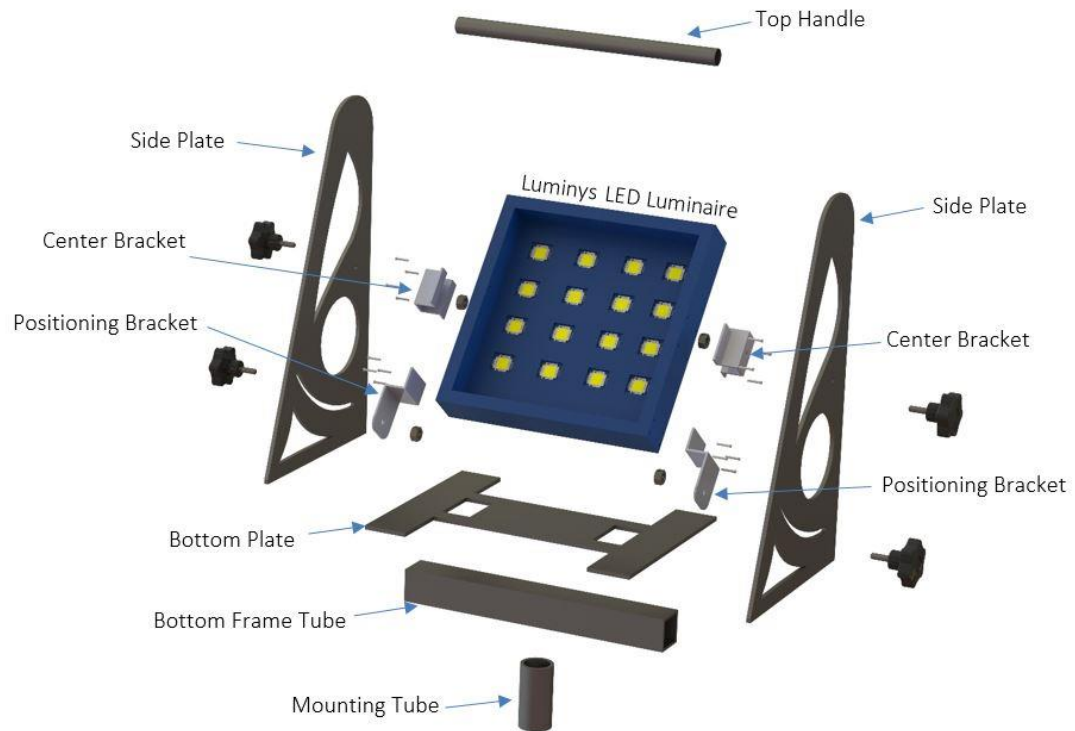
Exploded view of LED light mount assembly [53] used with permission.
